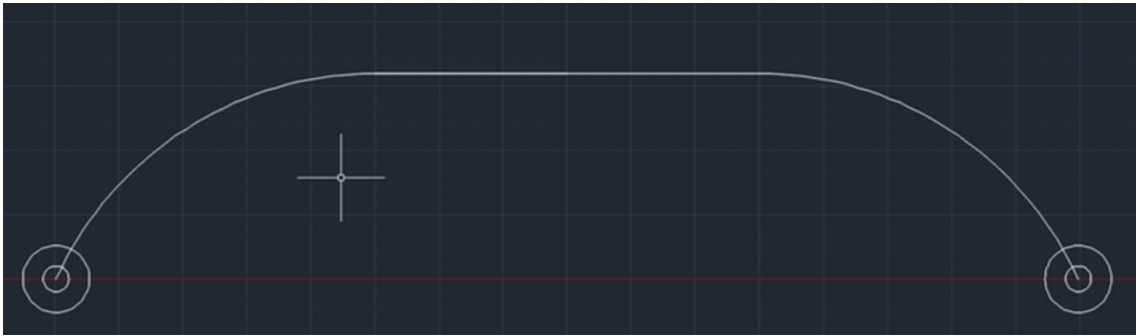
Front view for preliminary design for the Main Landing Gear
